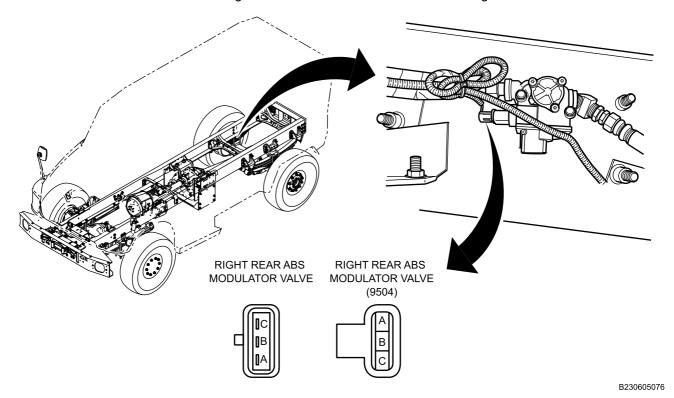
Inboard Right Frame Rail, Near Right Rear Wheel.
